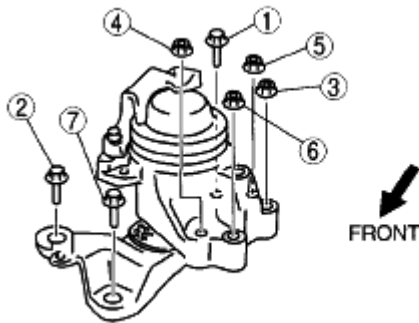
Identifying No.3 Engine Mount Bolt And Nut Tightening Sequence
